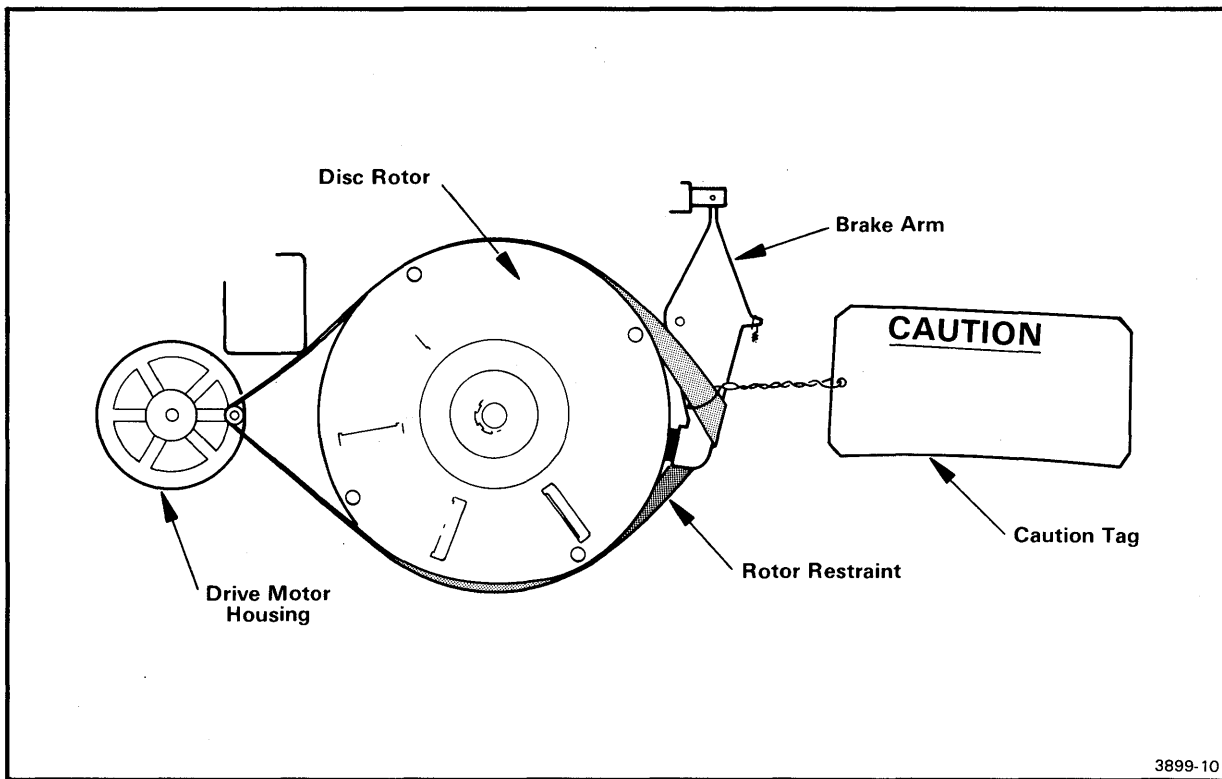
Hard-disc drive rotor shipping restraint.
